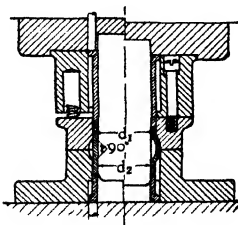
Bulging a tube by direct end thrust is limited to relatively low beads.
